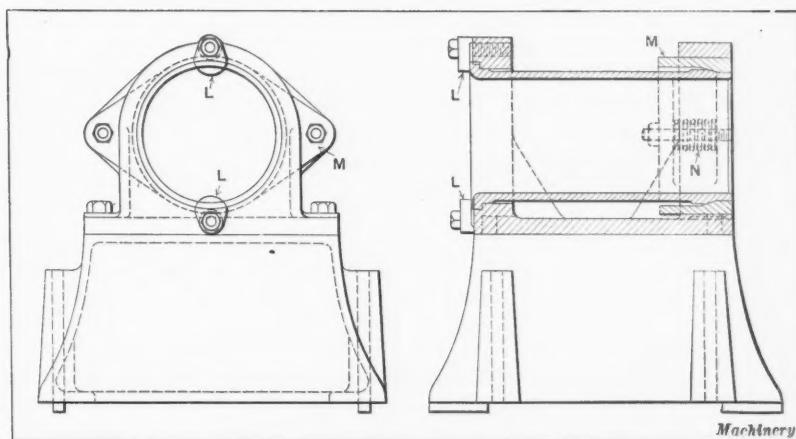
Design of Work-holding Fixture used on Machine illustrated in Fig. 4
